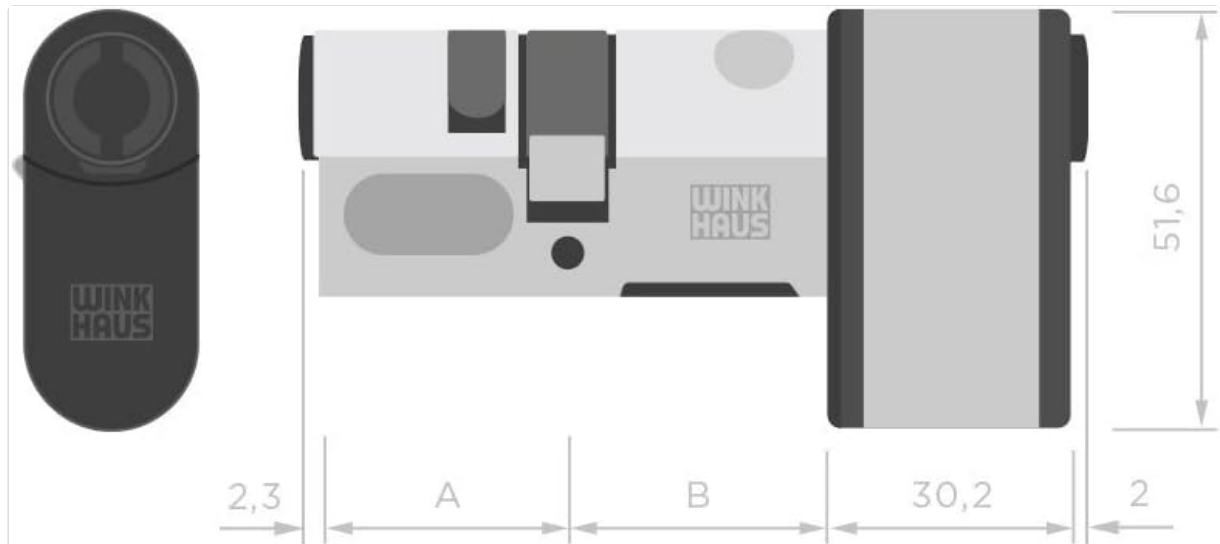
Technical drawing illustrating the dimensions of the blueCompact cylinder. 'A' represents the outer dimension and 'B' represents the inner dimension.
